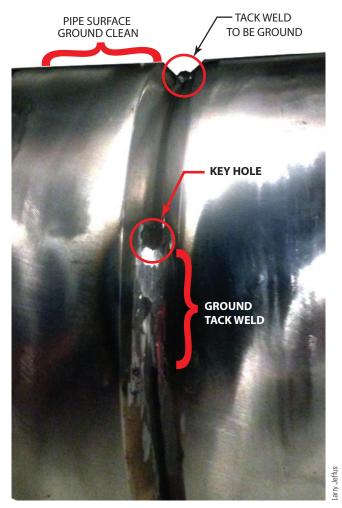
Proper pipe joint preparation and tack welding.
